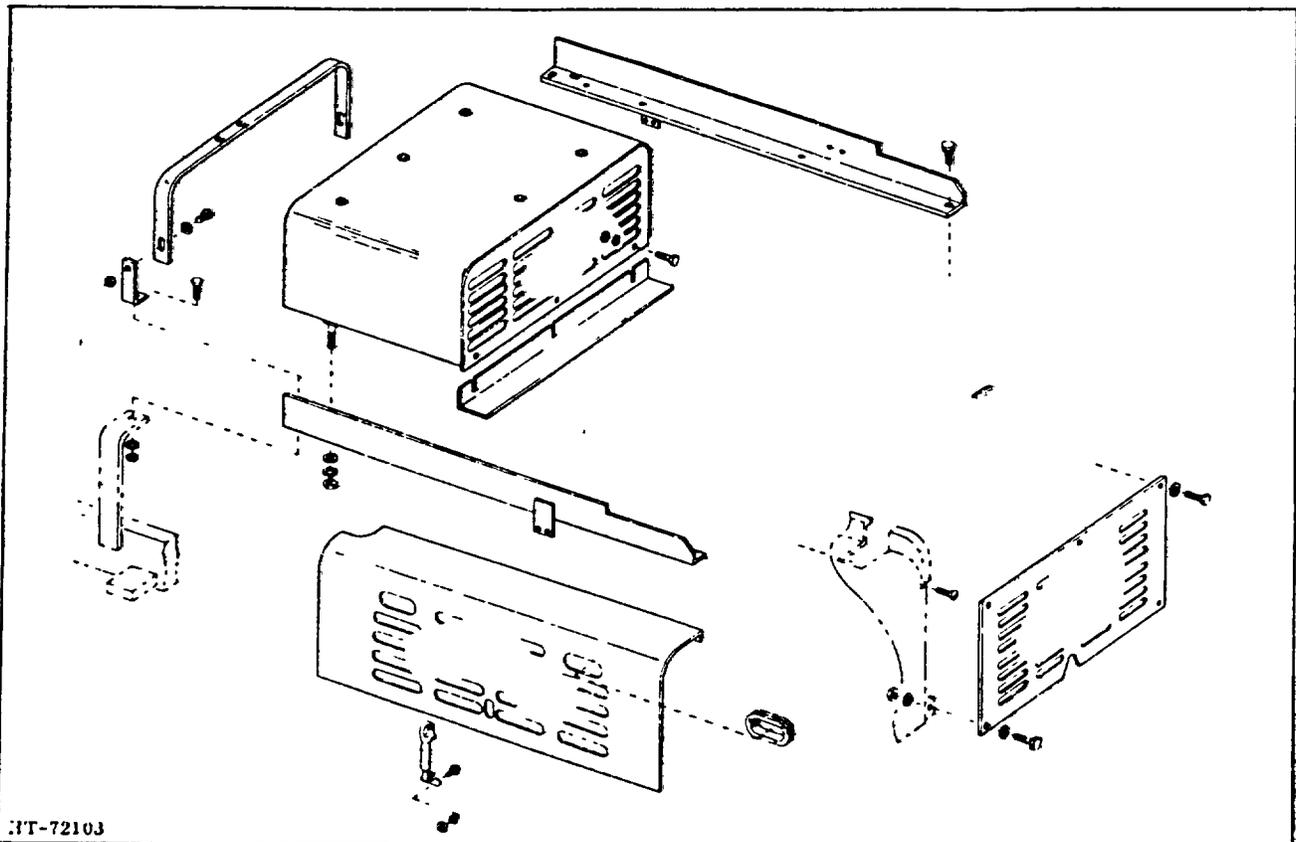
Engine Hood, Side Panels and Grille (Typical)
